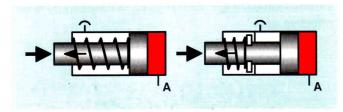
Single acting pressure cylinder; left: with internal spring, right: with external spring
